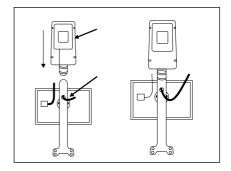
The street lamp head electric display is inserted into the lamp holder tube and then the small hole is passed out, and then the lamp holder is inserted into the lamp holder tube, and then the lamp holder is locked with 2 screws.
